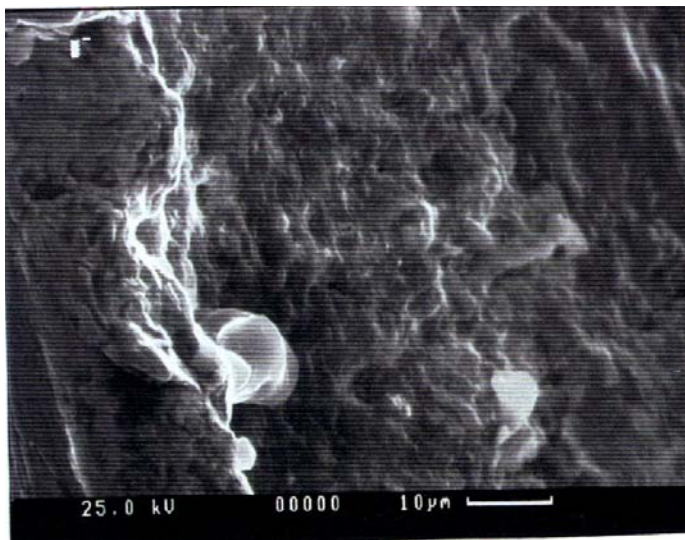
The SEM image shows N1 fracture surface in Figure 20. The fracture surface shows dimples, result by overstress.
